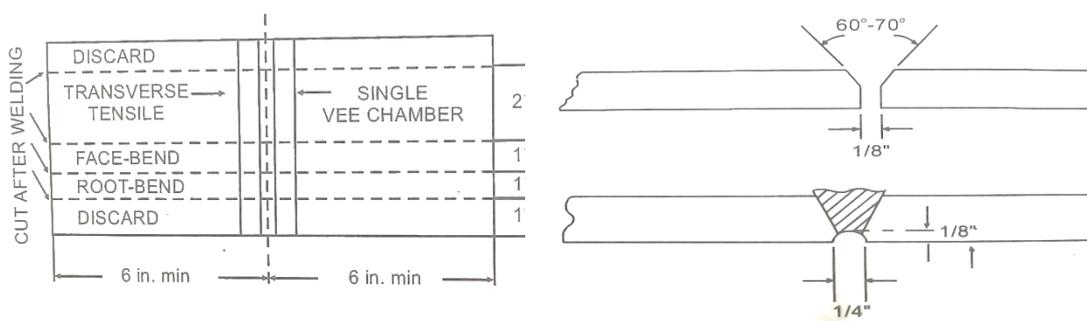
Method of Making Transverse Tensile & Bend Specimens.
